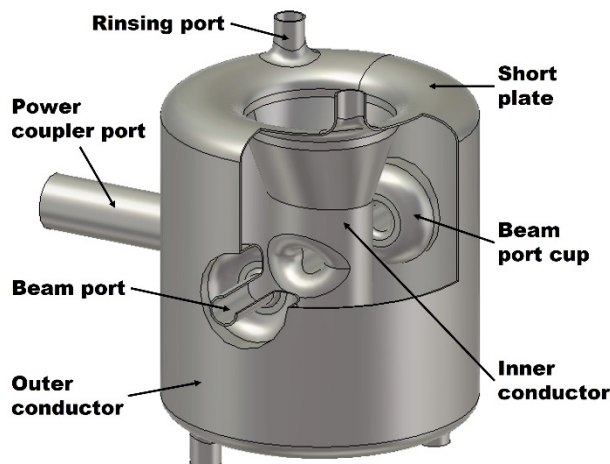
Cutaway drawing of the HWR designed by KOMAC.
